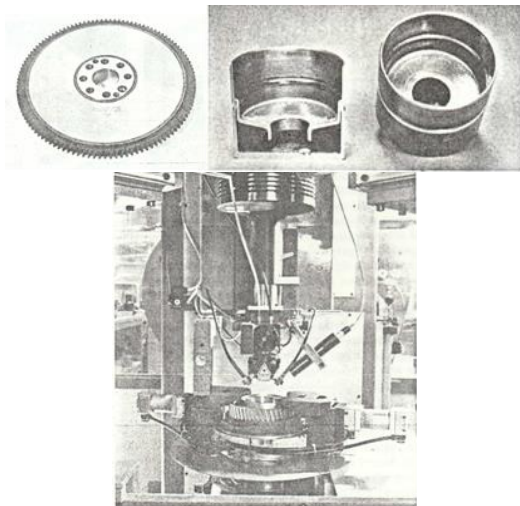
Details, welded with laser beam (companies Daimler-Benz, ZF, Leybold) [7]
